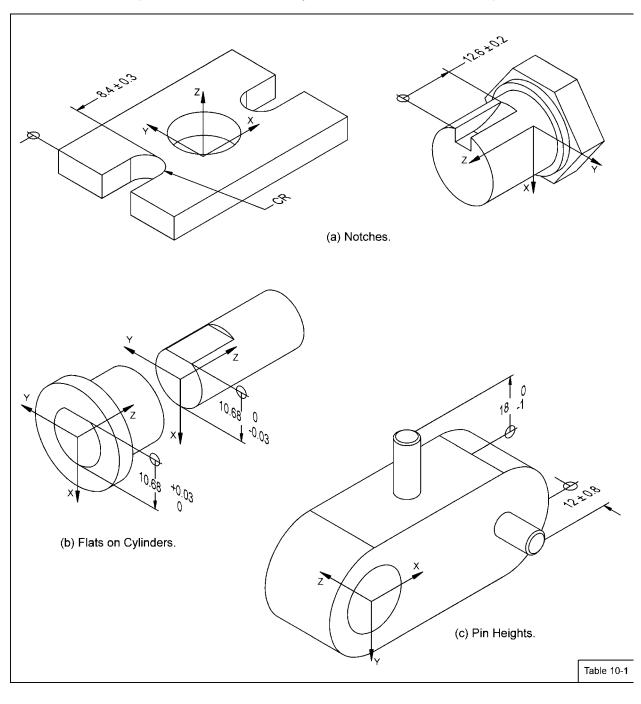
Attachment Techniques: Notches, Flats, and Pin Heights
